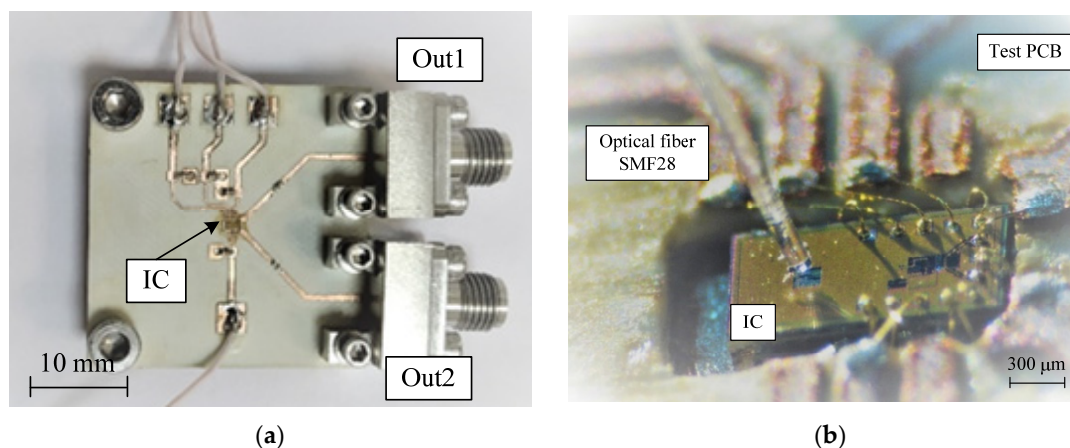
Photograph of the test PCB for photonic IC receiver (a) and optical fiber with a chip (b).
